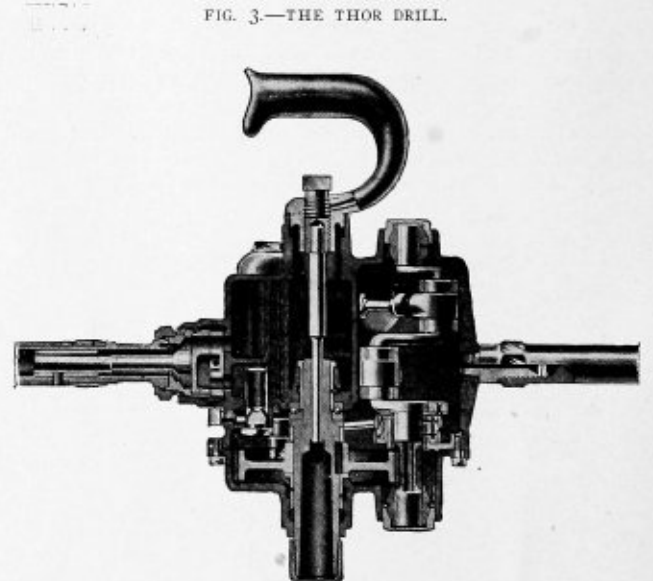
SECTIONAL VIEW OF THOR DRILL.
